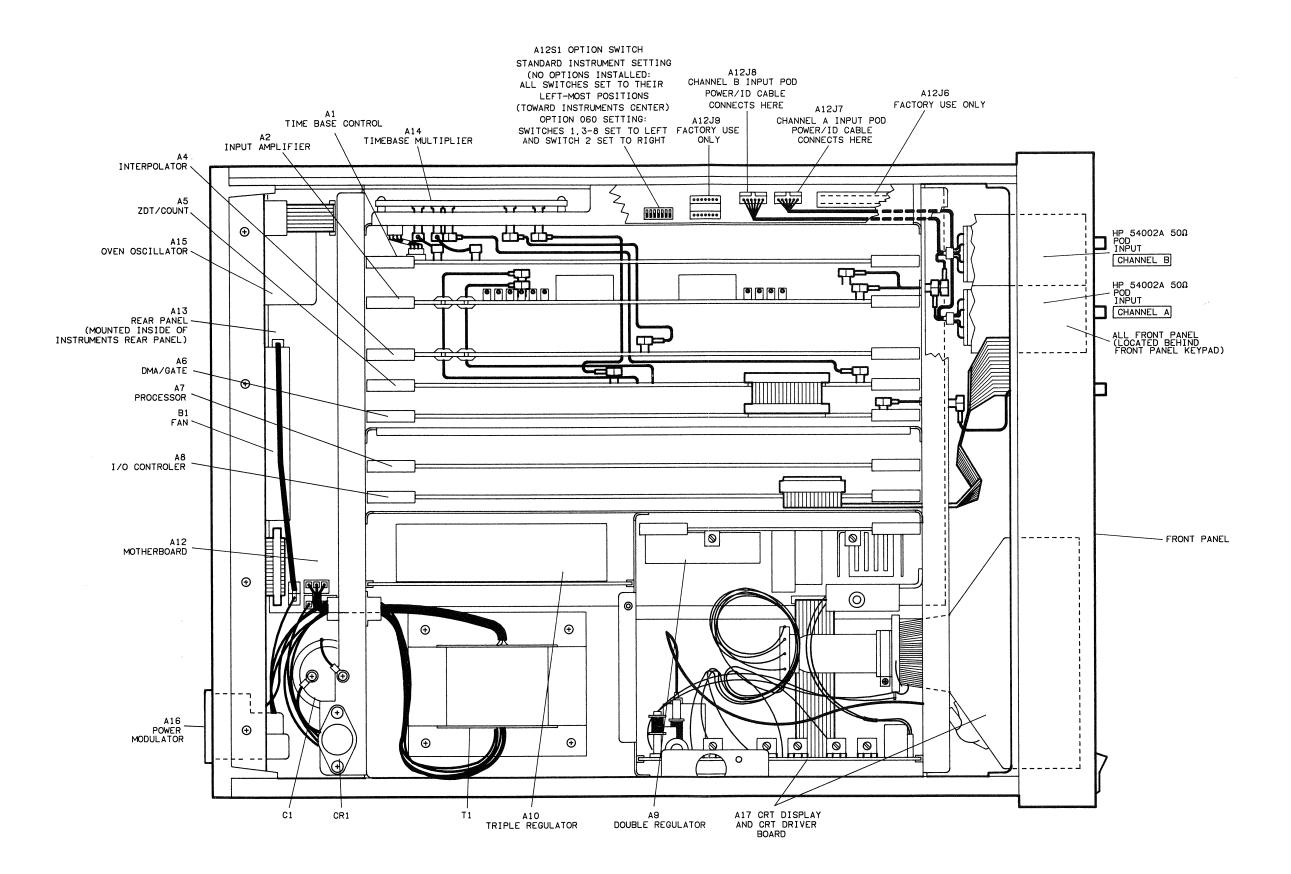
HP 5371A Top Internal View showing Assembly Locations
